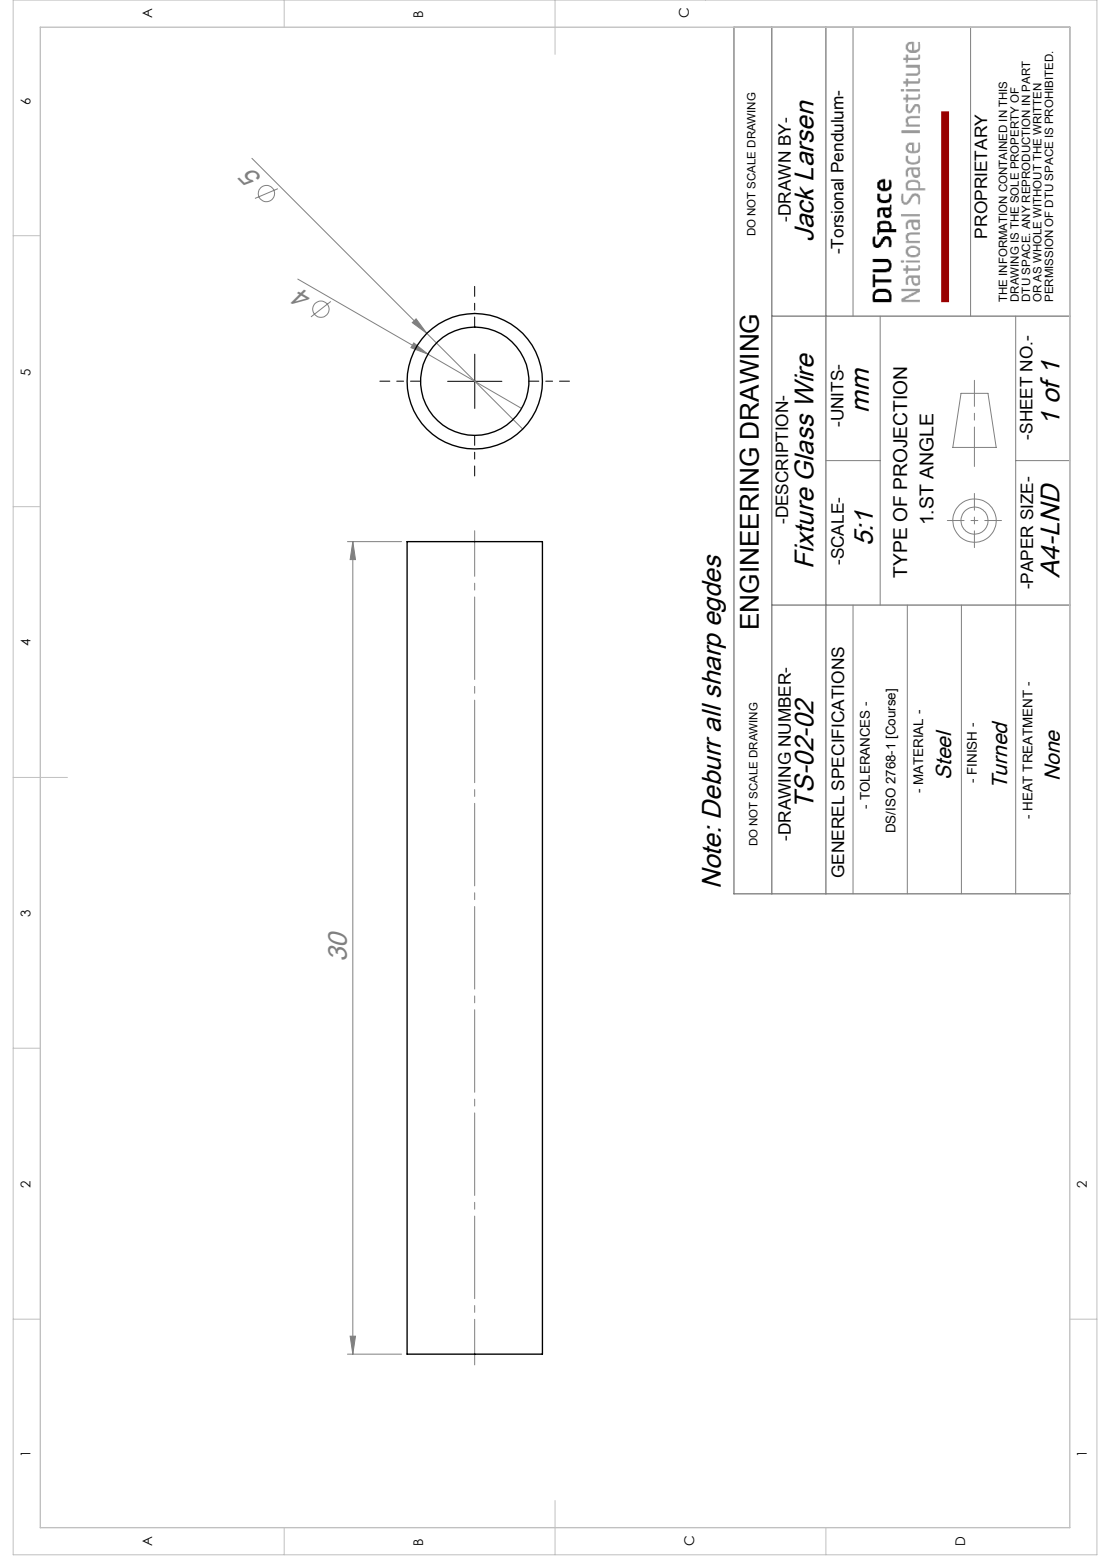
Test Setup: Steel tube in which the glass wire is glued, to prevent clamping directly onto the glass wire.
